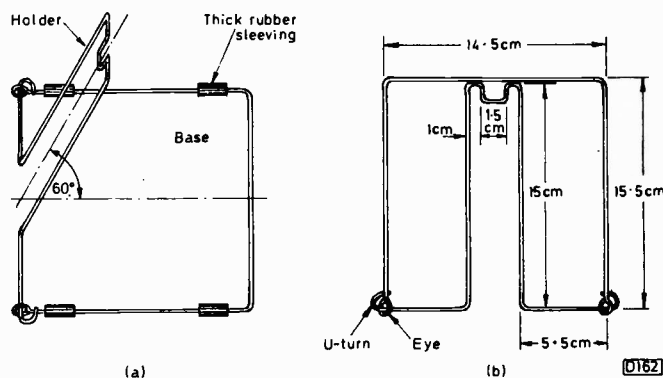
Details of the folding soldering-iron stand devised by reader Victor Rizzo. (a) In use. (b) Folded.
